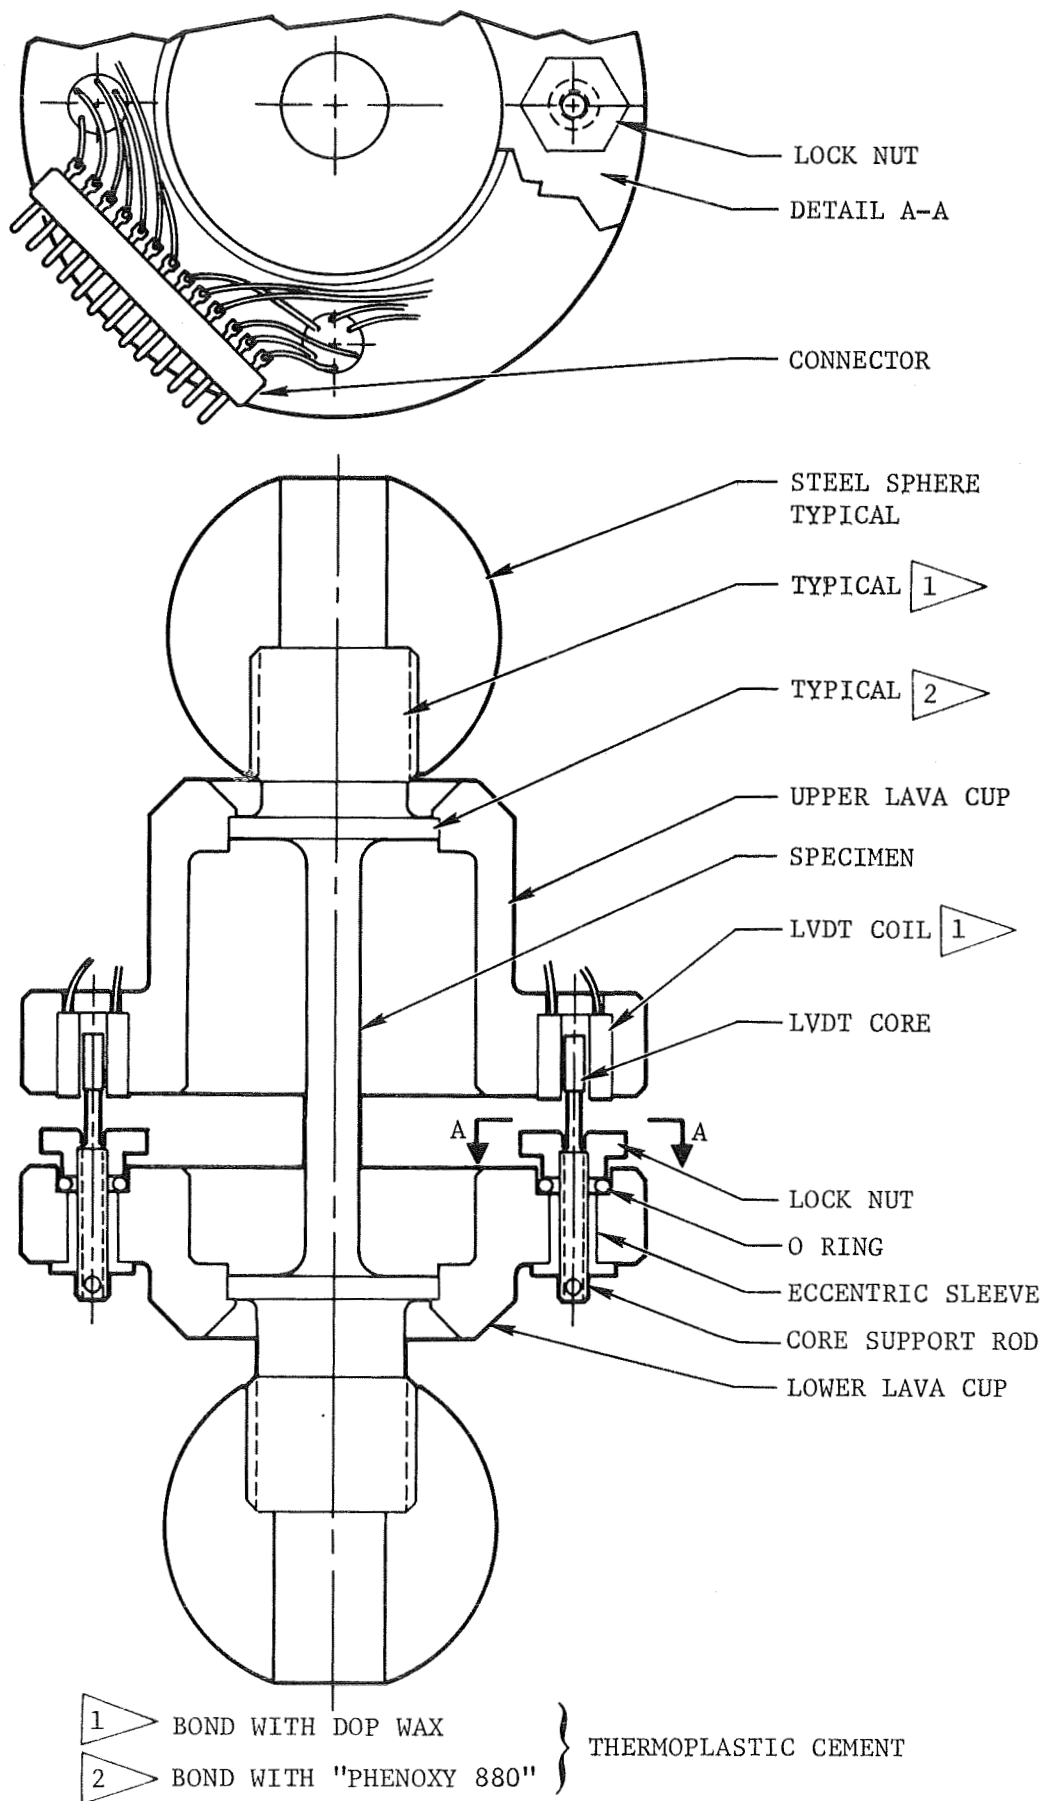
AXIAL EXTENSOMETER ASSEMBLY
